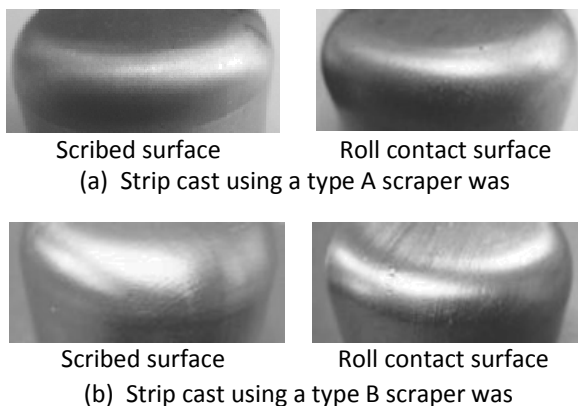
Deep drawing of annealed AA5182 strip. The thickness of strip was 1 mm, and the punch diameter was 32 mm. The LDR (limiting drawing ratio) was 1.8
